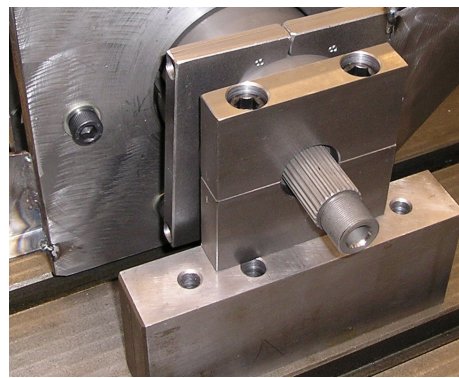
The fixation of the shaft on the side of the moving pulley halve
